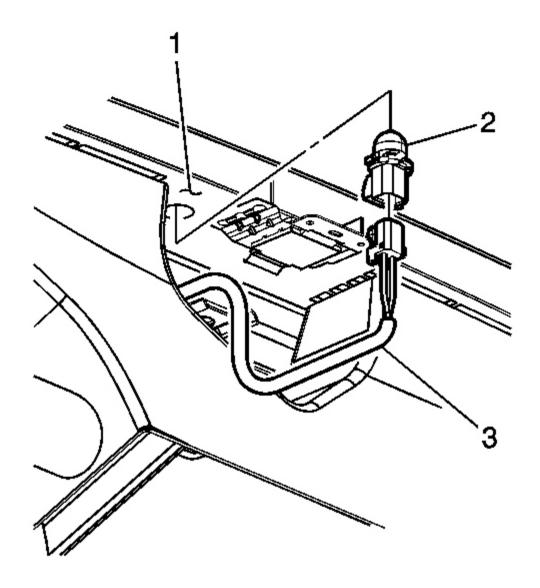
Sun Load Sensor & I/P Upper Trim Pad Courtesy of GENERAL MOTORS CORP.
